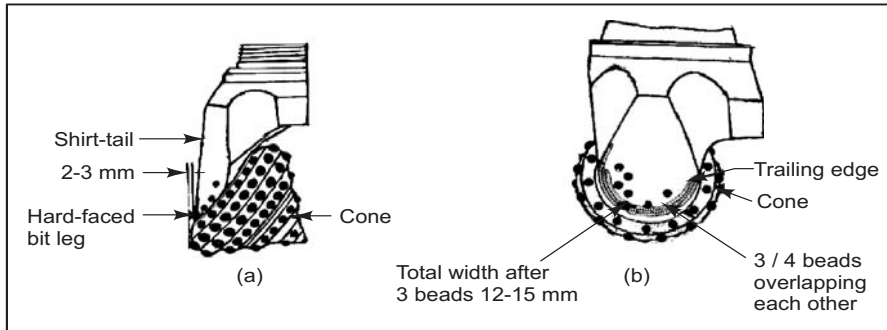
Hard-faced rock roller bit: (a) Hard-faced bit leg and cone showing the clearance required between cutting section of cone and bit leg, (b) Deposition of metal on a worn bit leg by arc welding. Note the deposition from trailing edge closely overlapping the previous bead and maintaining same bead thickness
